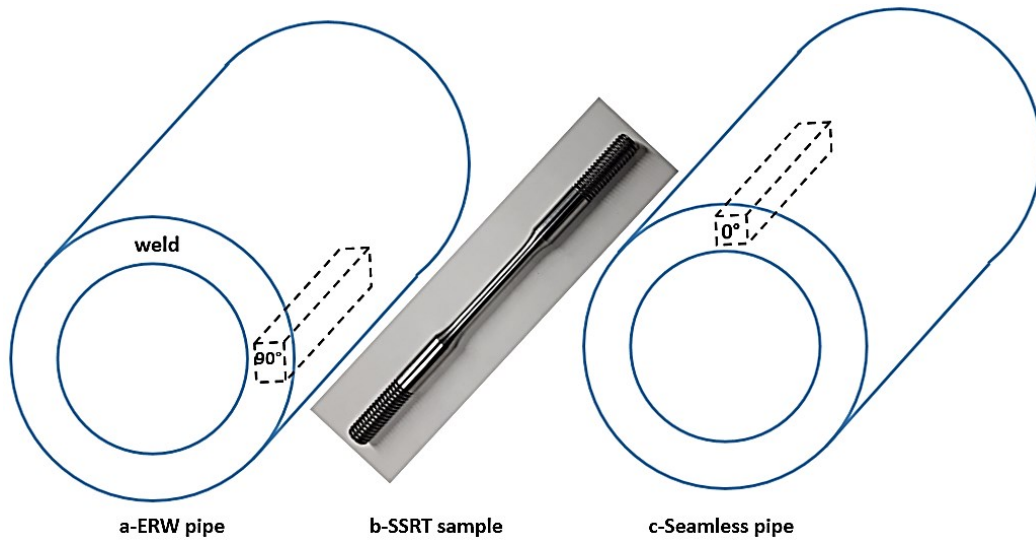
a,c) Location in the pipe where the SSRT sample was machined, b) photo of a machined and untested SSRT sample.
